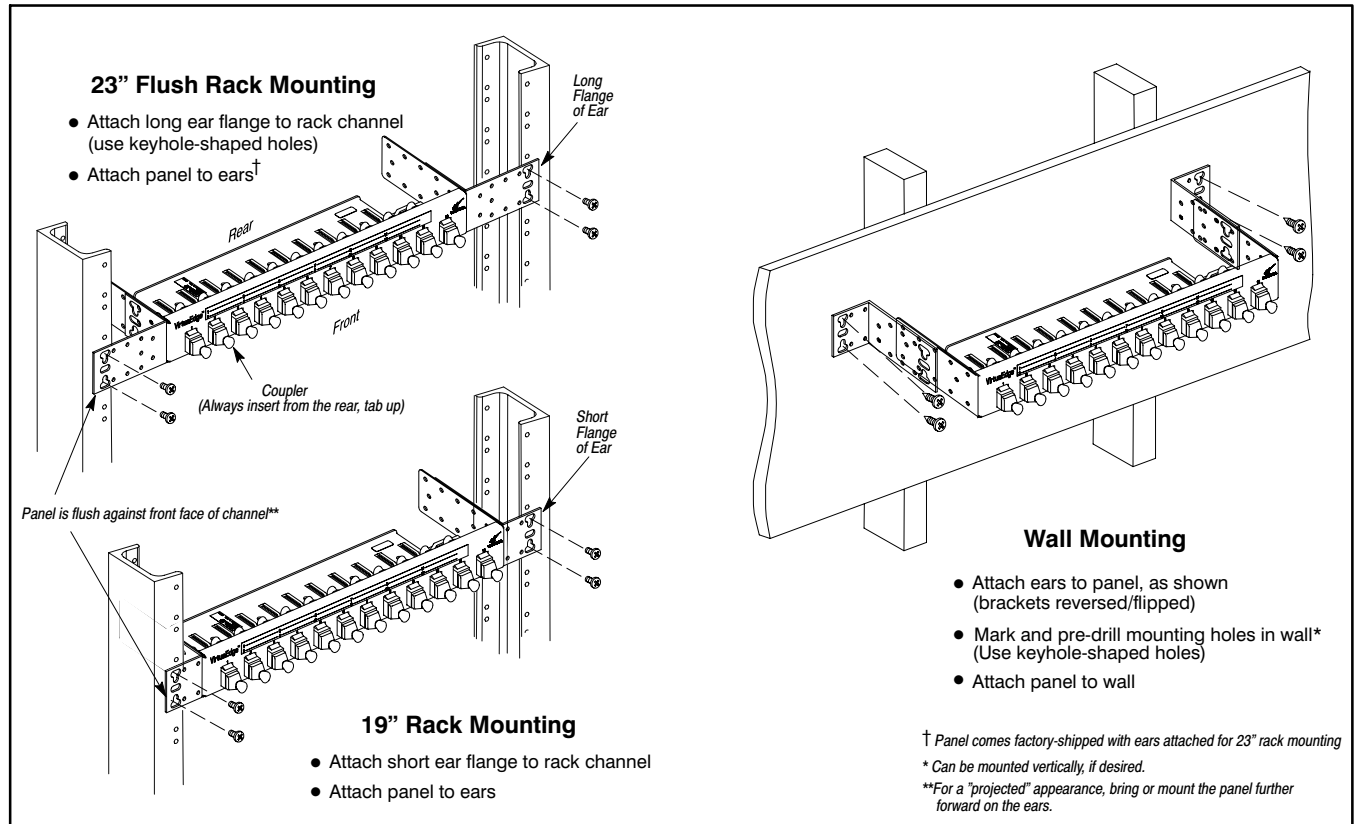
Mounting Views of the 12-Position Connectivity Panel
